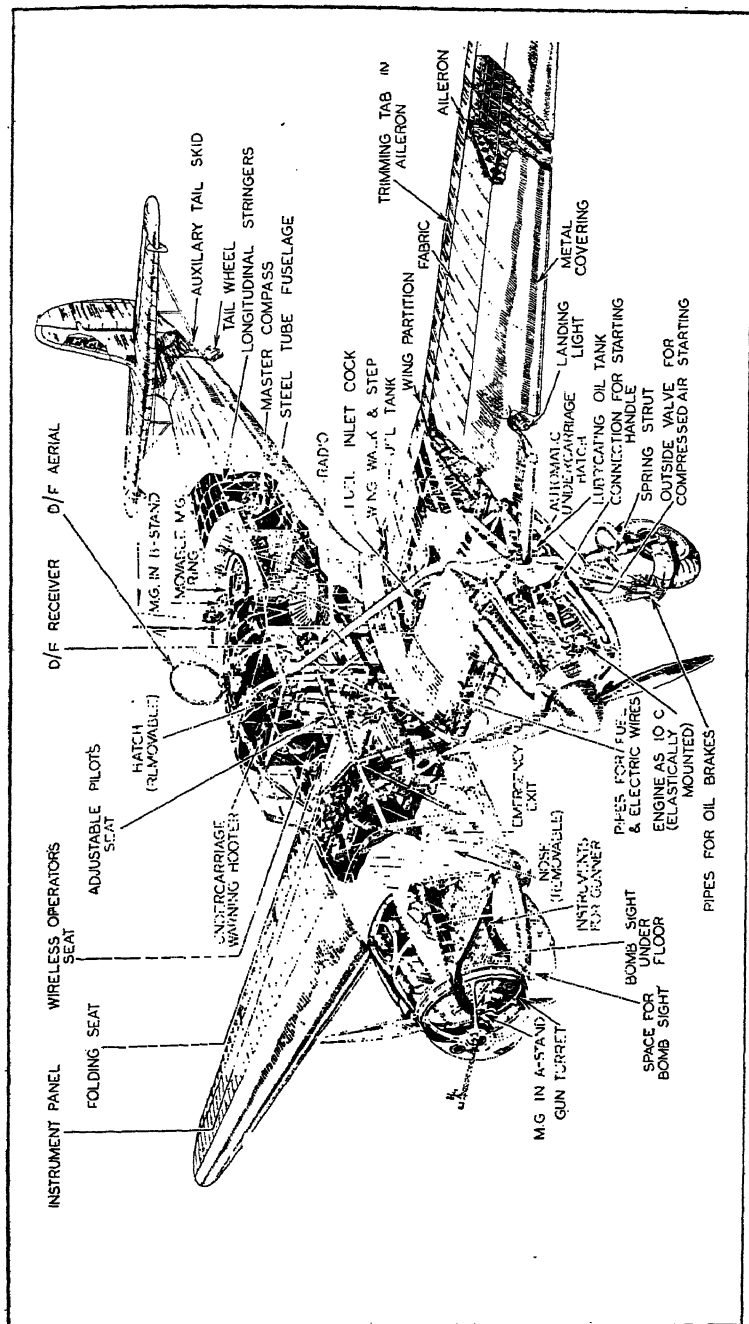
DETAILS OF THE CONSTRUCTION AND EQUIPMENT OF A FOREIGN-MADE AEROPLANE
